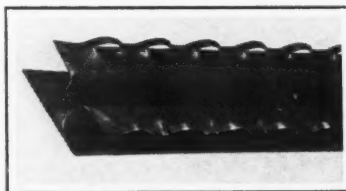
Steel Strip Formed in Machine Shown in Fig. 1
